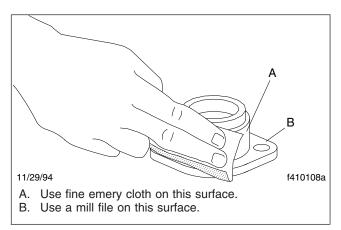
, Smoothing a Full-Round Yoke U-Joint Bearing Cup
